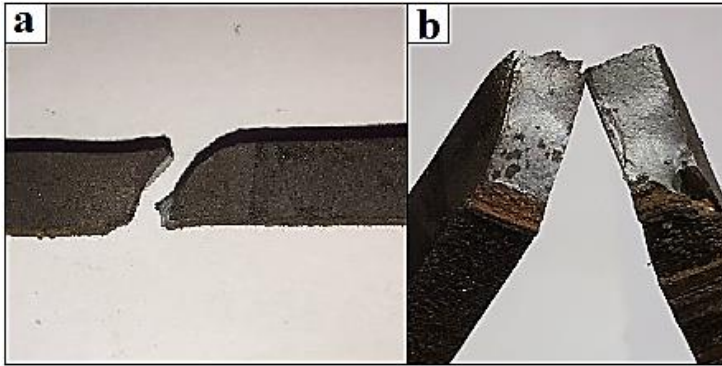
Fracture of one of the A3 tensile test specimens (a): fracture mode (b): cross-section of fracture.
